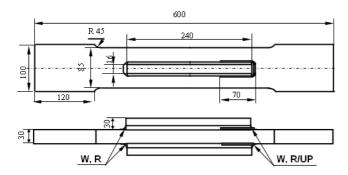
Drawings of welded specimens for fatigue testing at different conditions:
